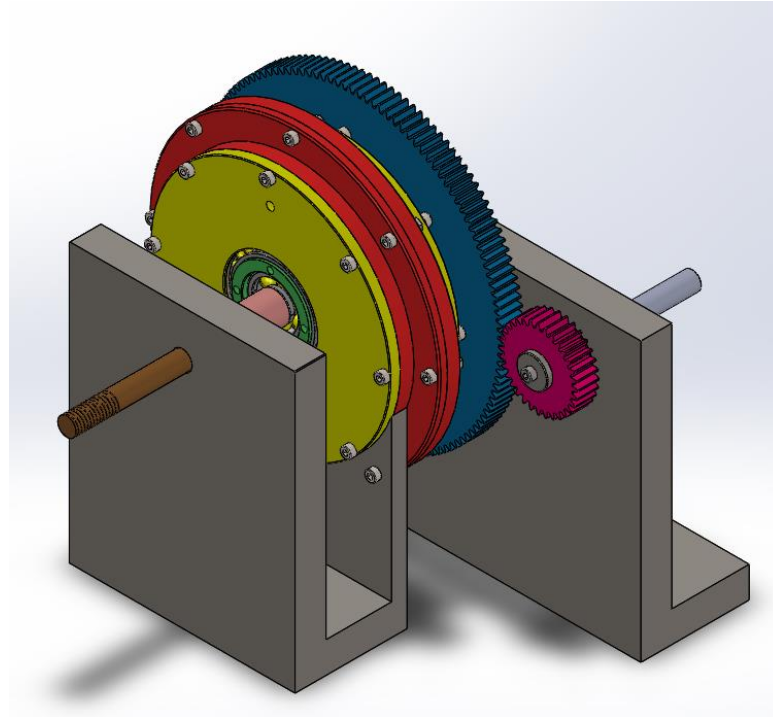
Full assembly of driven shaft, driving shaft and holders
